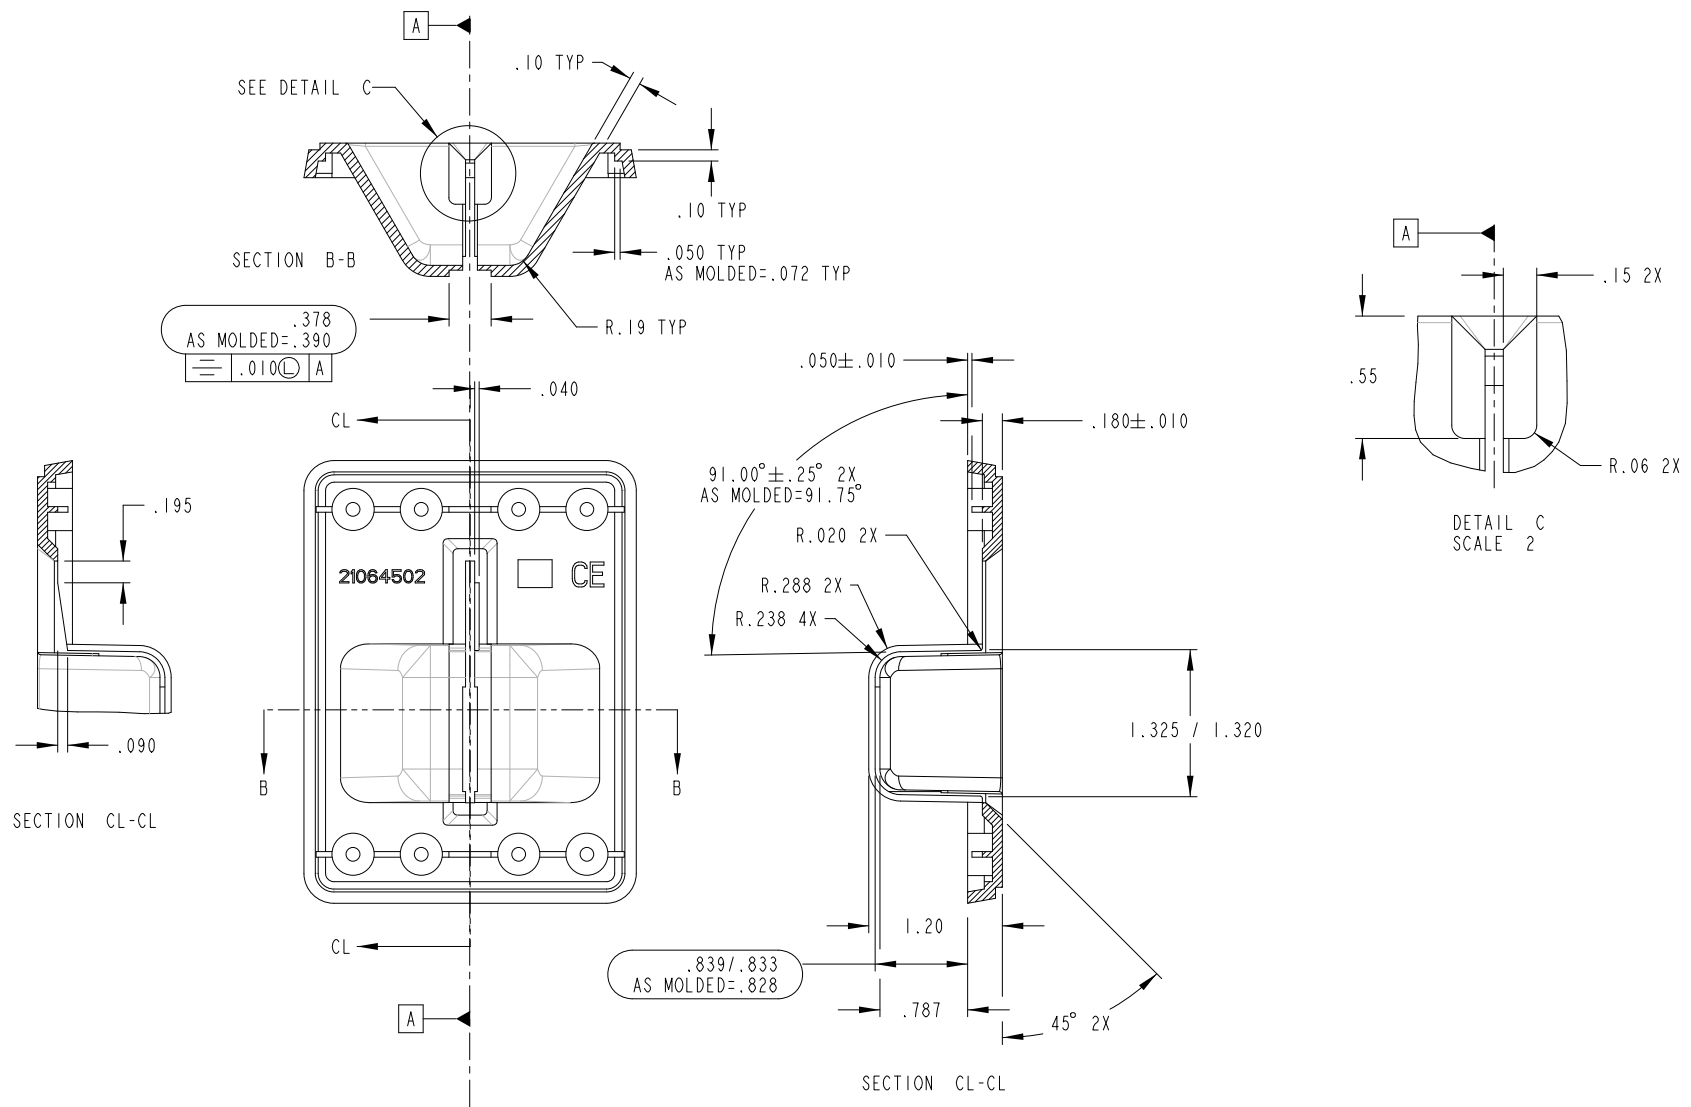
Dimensions for Flat-Faced Bezel Design Sheet 2
